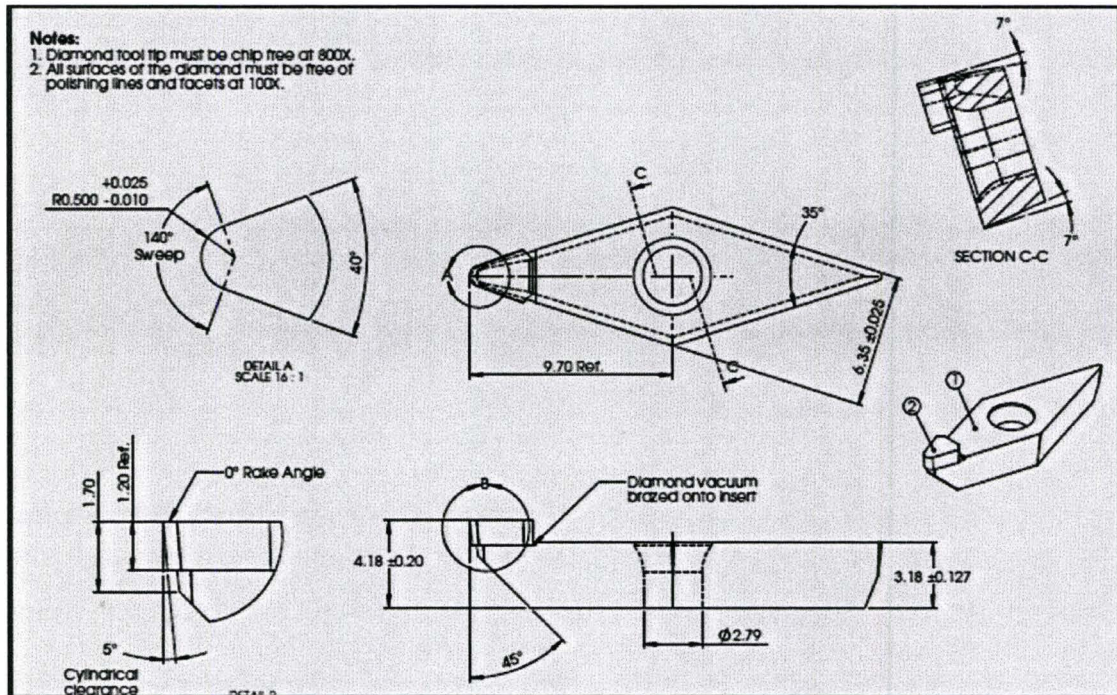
Design of diamond insert and the tool holder (K&Y – used with permission)
